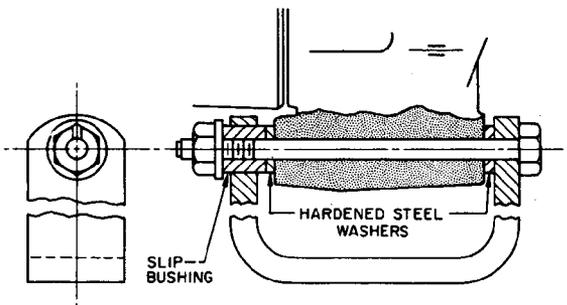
TYPICAL INSTALLATION OF SPLIT BUSHING IN BRACKET FOR SPOOL MOUNTING
